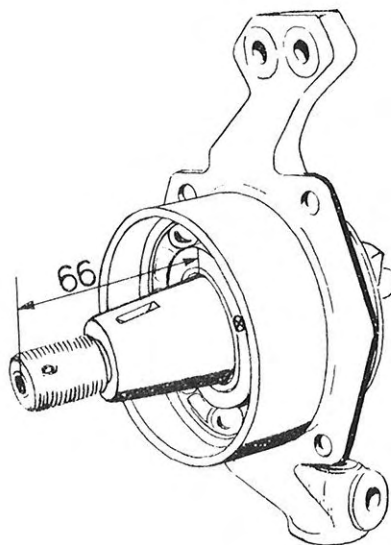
Pressing in outer drive shaft, and marking off ball bearing.
